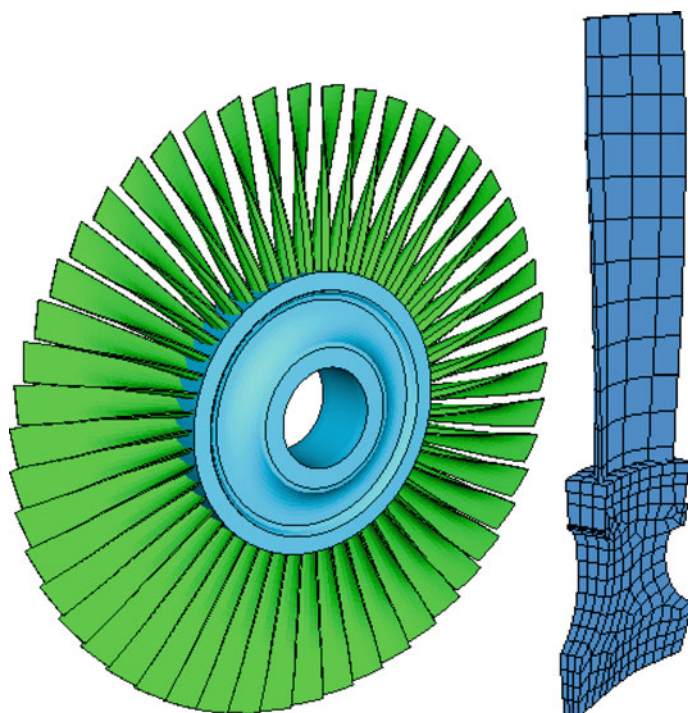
A segment of bladed-disc FE model (courtesy of Siemens)
